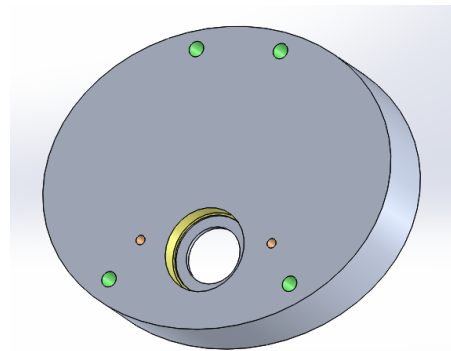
Design of the top housing (outside view). The housing is in light-grey, the attachment bolt holes in green, the inlet holes in orange and the bearing hole in yellow.
